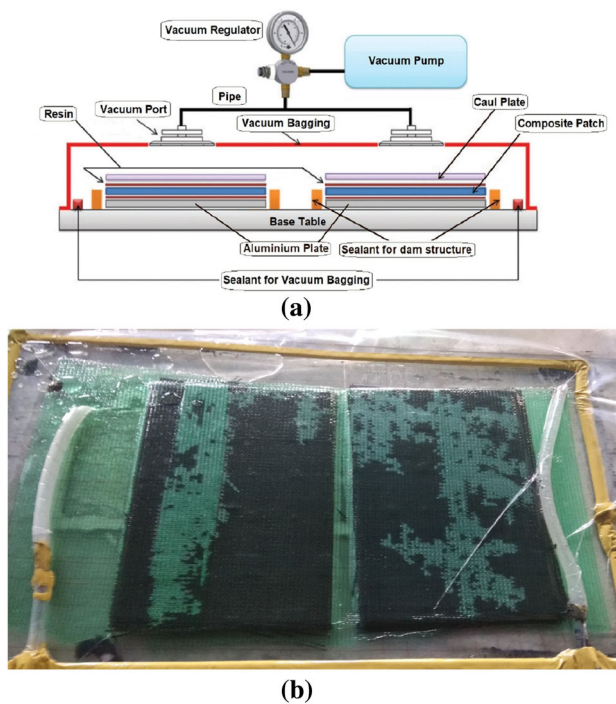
a Schematic of Double Vacuum Press technique, b curing of patch samples in the vacuum press
